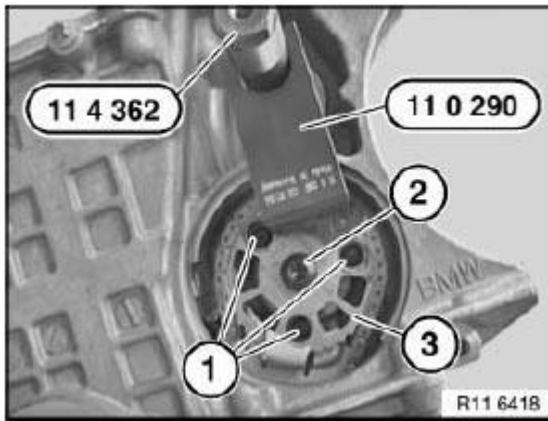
Special Tool (11 4 362) And (11 0 290), Screw And Sprocket Wheel
